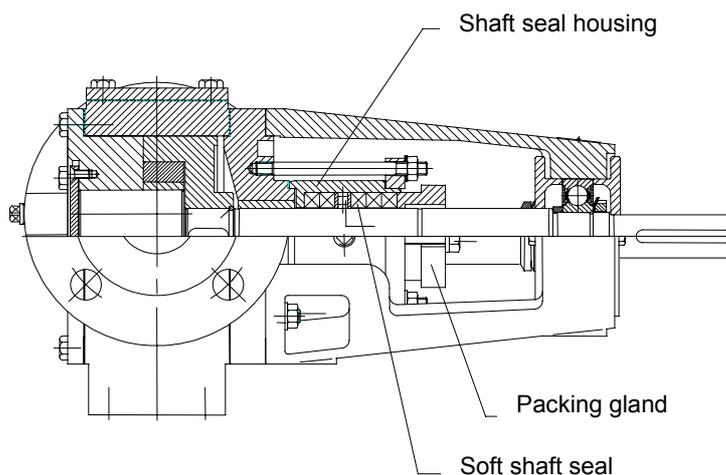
The location of the soft shaft seal, the shaft seal housing and the packing gland on the pump. The design of the shaft seal housing, does, however, depend on the individual pump application.
